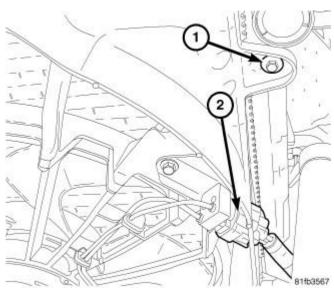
Electrical Fan Connector & Bolt Courtesy of CHRYSLER LLC
